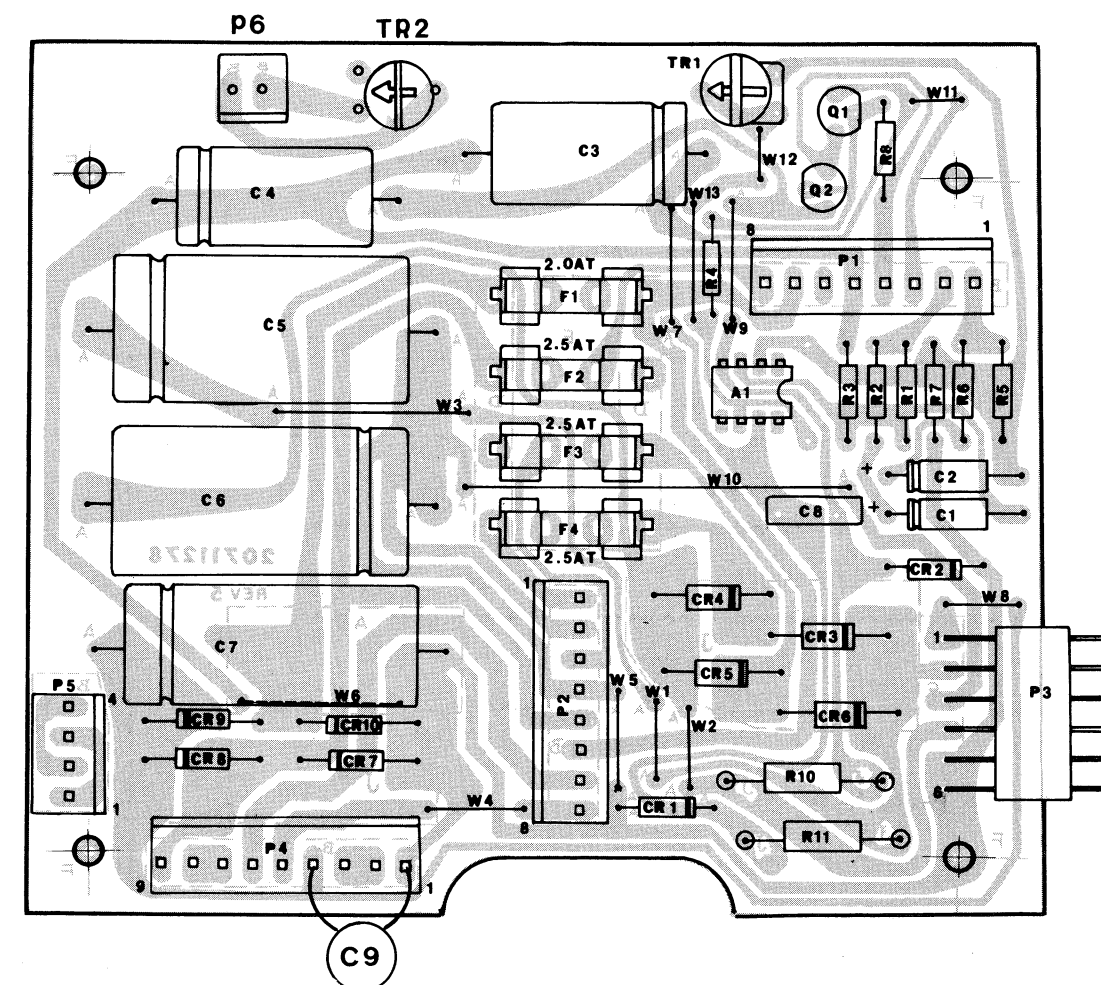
Power Supply PCB Assembly (Autofocus Models Only)
